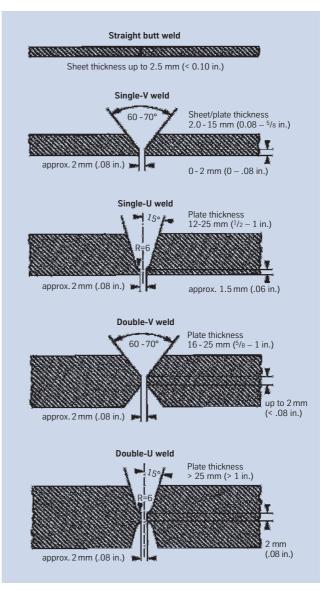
Edge preparation for welding of nickel alloys and special stainless steels.
